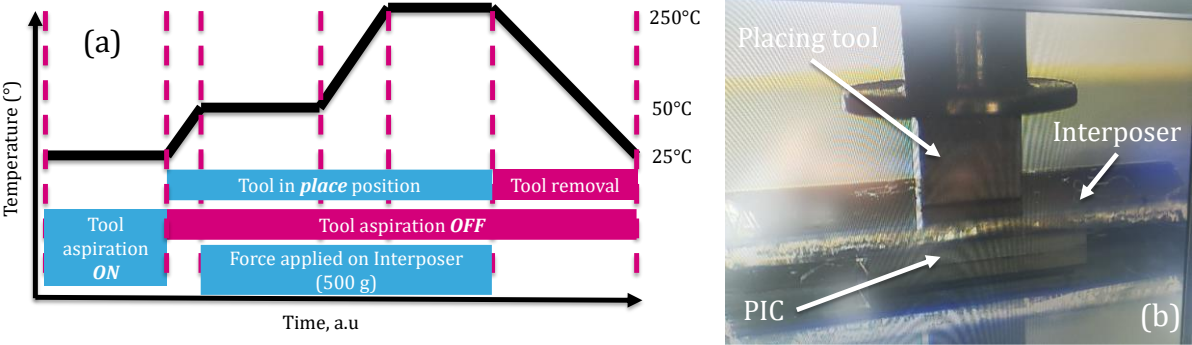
Eutectic cycle of the flip-chip assembly (a) and side camera picture of the interposer and PIC25G IC during assembly (b)
